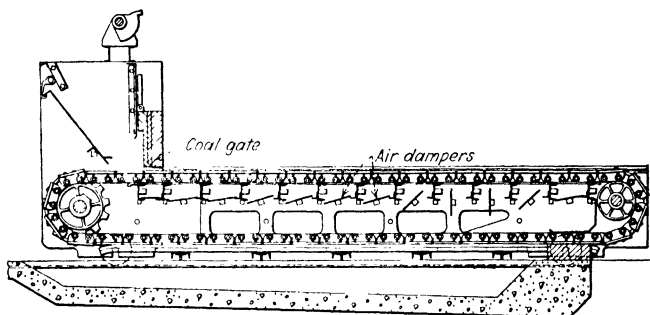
Natural-draft chain-grate stoker with front-drive sprocket.
